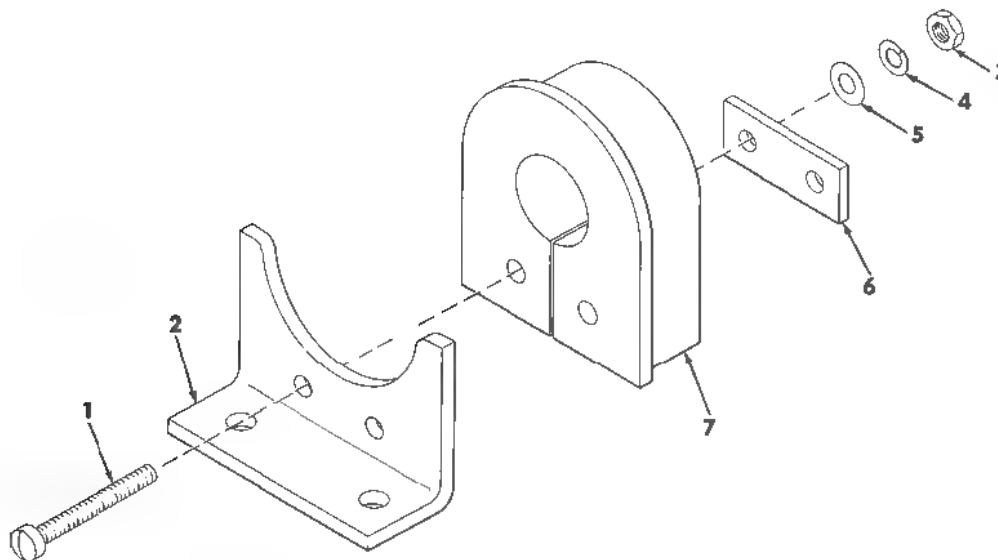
ROLLER /8171783/-EXPLODED VIEW
